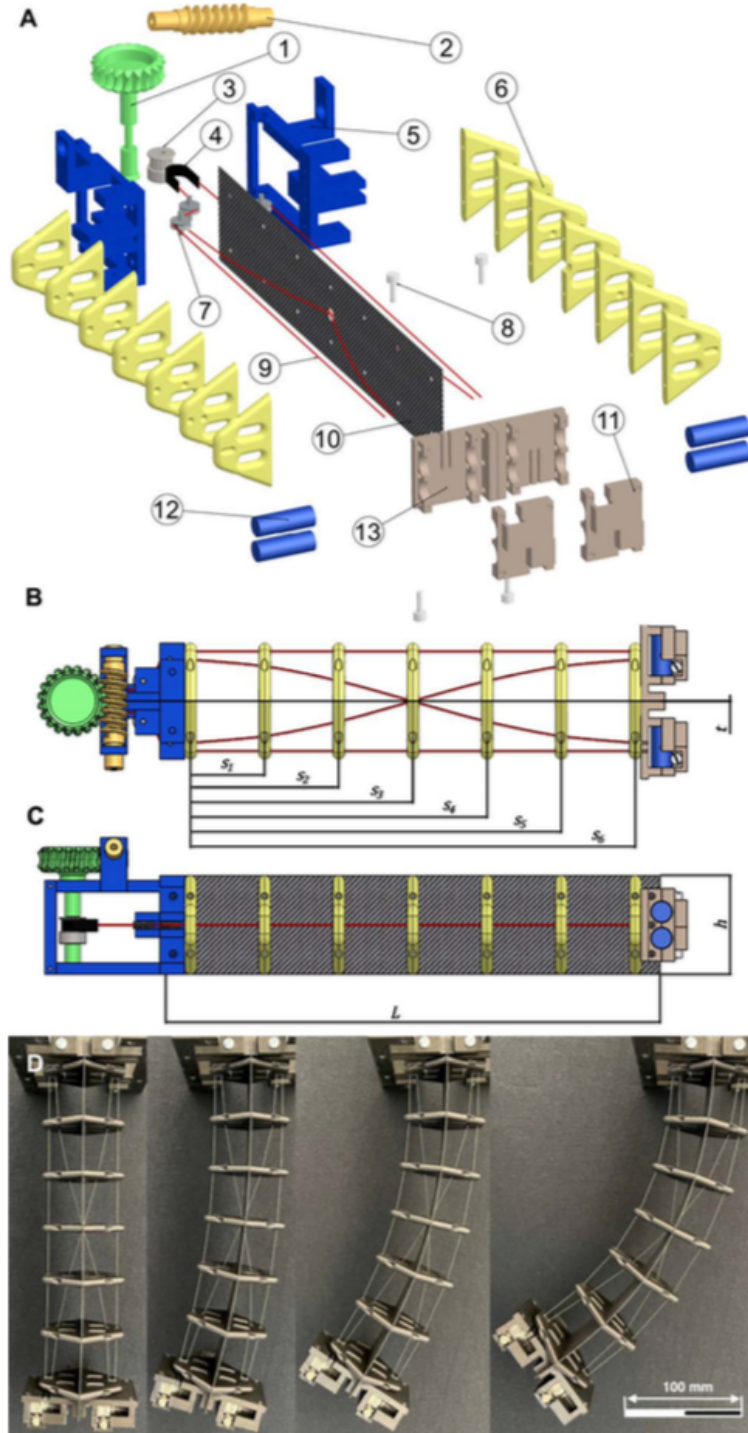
A. Exploded view. ① worm gear ② worm ③ timing pulley ④ timing belt segment ⑤ base frame ⑥ cable supports ⑦ cable routing pulleys ⑧ fasteners ⑨ cables ⑩ carbon fiber backbone ⑪ tensioner clamp ⑫ tensioner barrel ⑬ tensioner housing B. Top view (assembled). C. Side view (assembled). D. Sequence (left-to-right) of increasing curvature caused by turning the worm. All cables are pretensioned.
